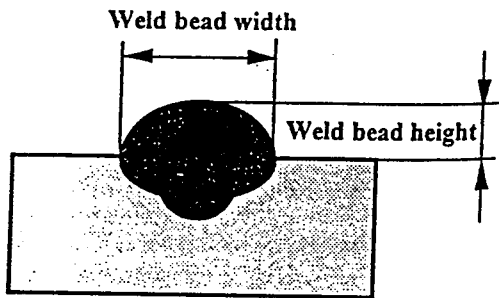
Metallographic weld sample showing measurements of weld bead width and weld bead height
